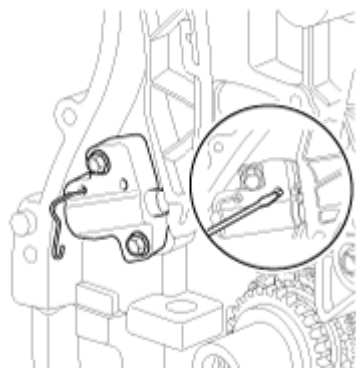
Identifying Pins Of LH/RH Hydraulic Tensioners (1 Of 2)
